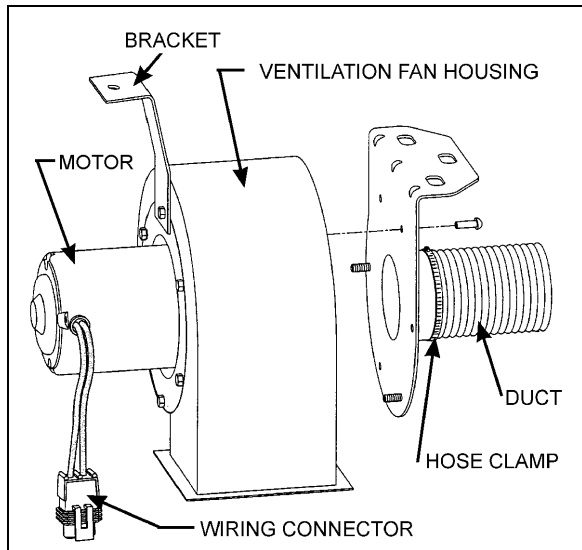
VENTILATION FAN INSTALLATION 23222
